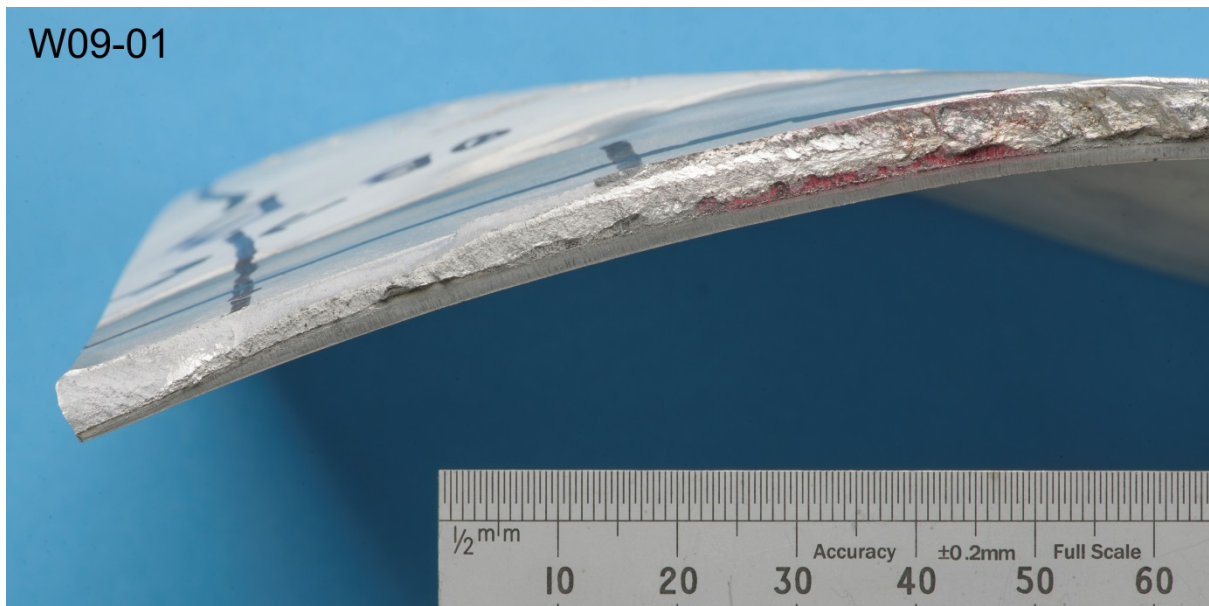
J2580 sample W09-01 fracture surface (left).
